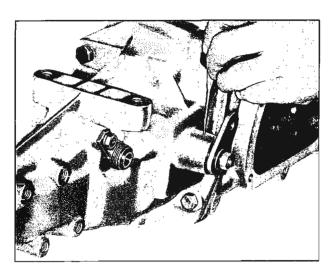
A-15 Removing Shifter Shaft Lock Pin
